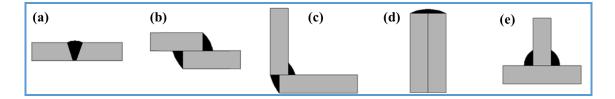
Different types of joints: (a) butt joint, (b) lap joint, (c) corner joint, (d) edge joint, and (e) tee joint.
